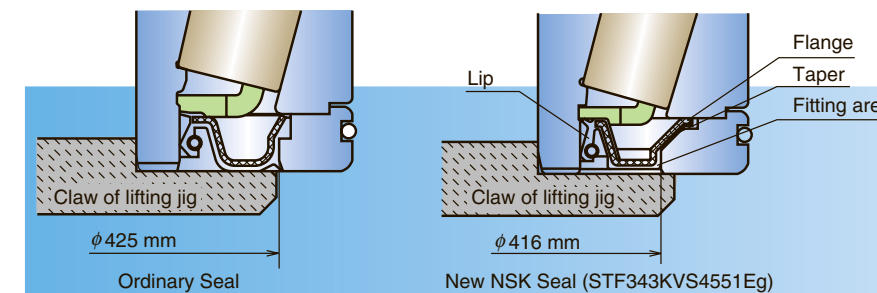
Seal Comparison (Typical cold mill roll neck bearing)
